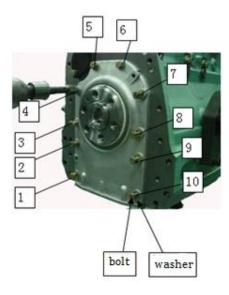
tightening sequence of rear oil seal cover bolt
